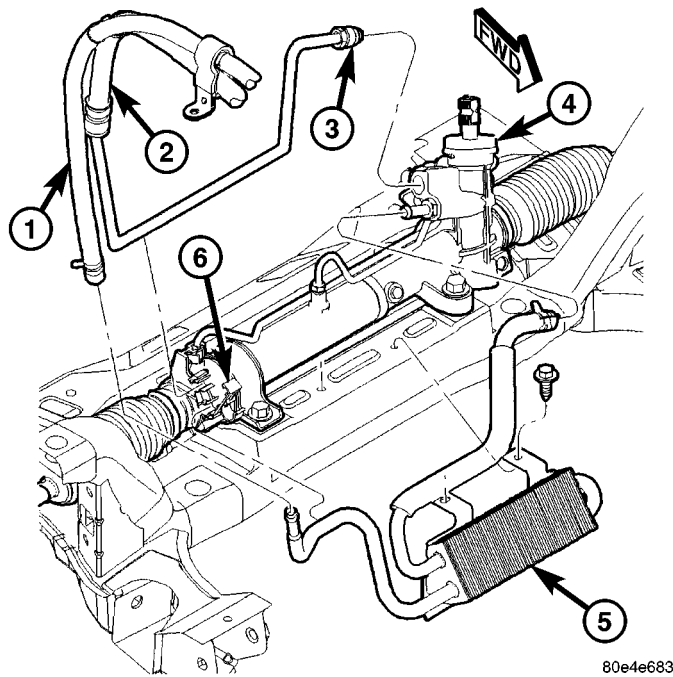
Hoses And Cooler At LHD Gear - 2.0L Engine
